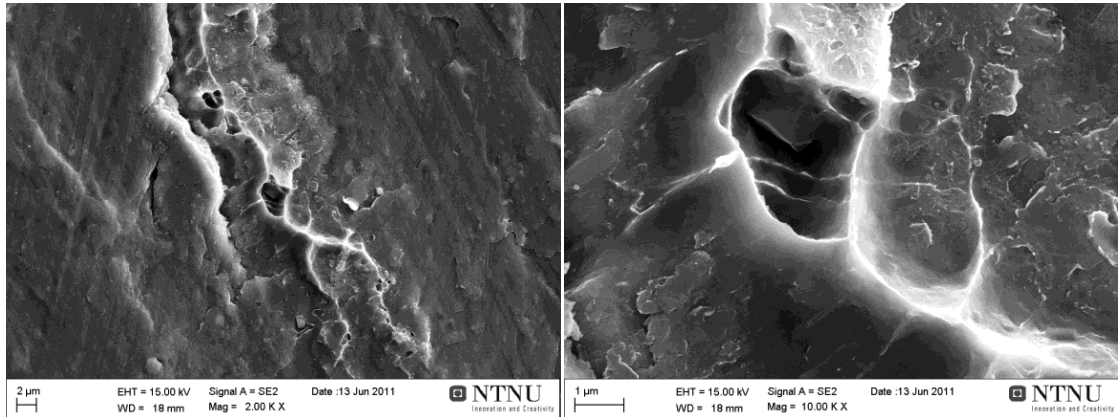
Typical sign of a ductile fracture seen on the fracture surface of sample B2A04-T1 A.
